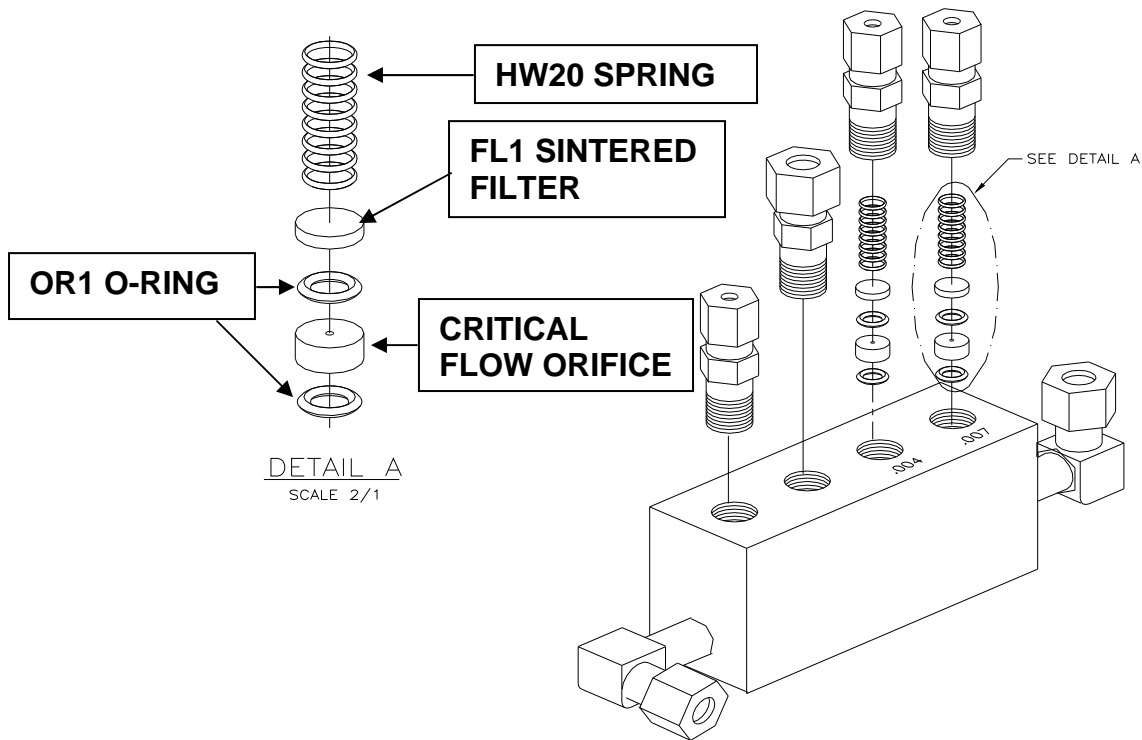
EXHAUST VACUUM MANIFOLD SHOWING THE ADDITIONAL 0.004" FLOW ORIFICE ASSEMBLY.
